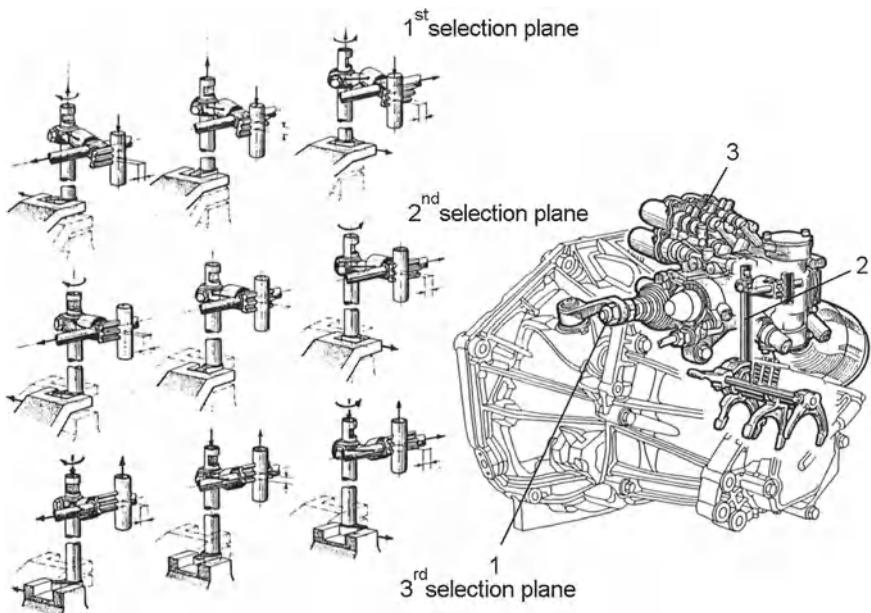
Scheme of an electro-hydraulically actuated internal shifting mechanism. A Hydraulic actuator 1 disengages and engages the clutch, while a second combined actuator provides for rotation of the shaft 2; a hydraulic group 3 includes an oil pump, a pressure accumulator and the electric actuation valves (courtesy of Marelli)
